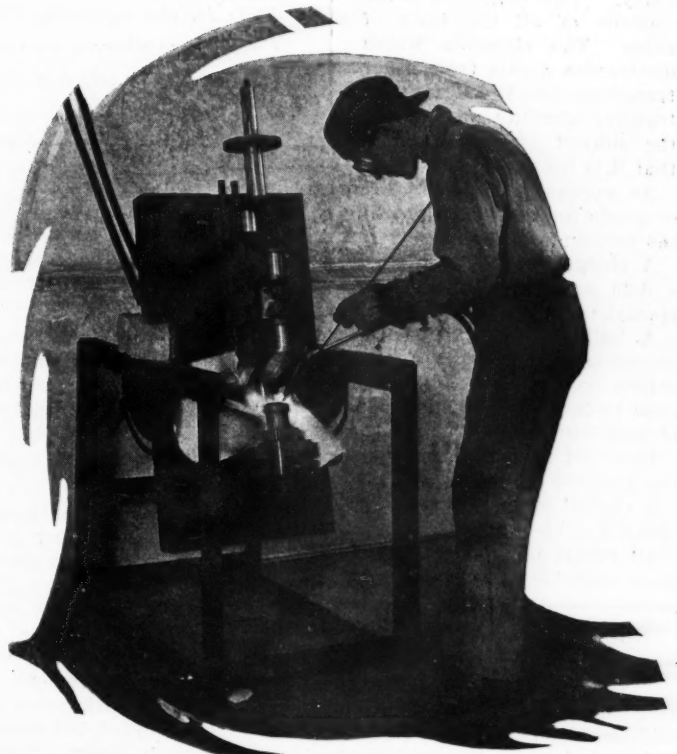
Method of welding. Note the flame of the preheating torch is removed during the welding operation
